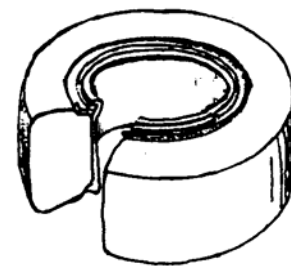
DETAIL NOTE: THE INNER LOCKING RING SHOULD BE CUT IN SECTIONS FOR EASE OF HANDLING
